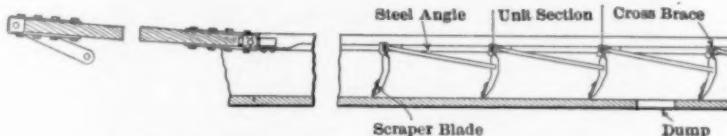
SIDE VIEW OF RECIPROCATING CONVEYOR
